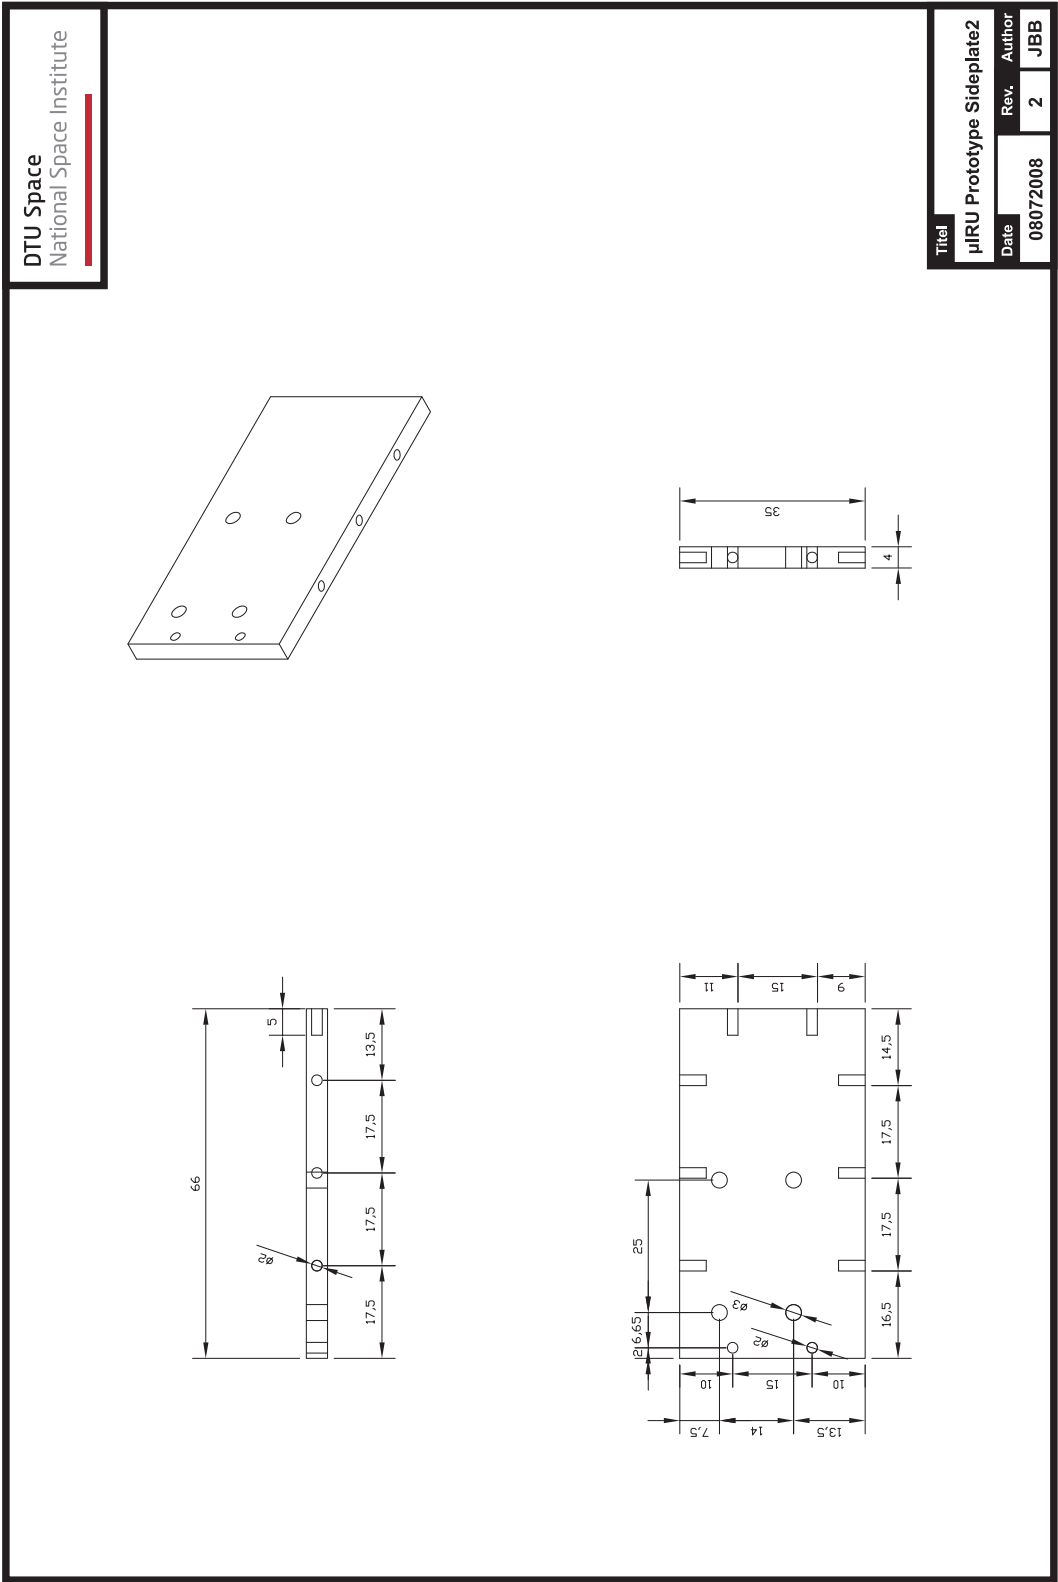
$\mu$ IRU prototype sideplate 2 mechanical drawing.
